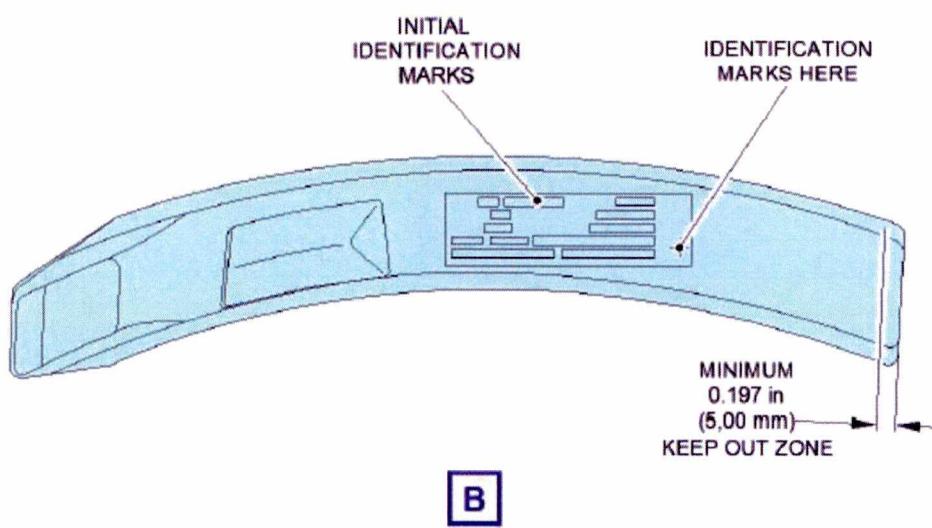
, Sheet 6: LP compressor fan blade assembly – Repair details and dimensions (Sheet 6 of 89)
